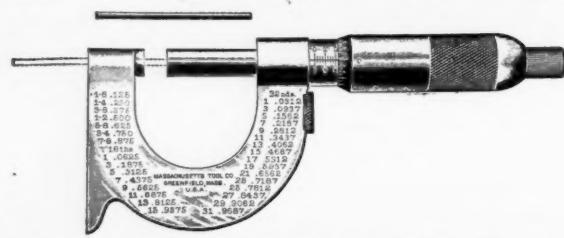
Micrometer Caliper with Depth Plug Attachment.
